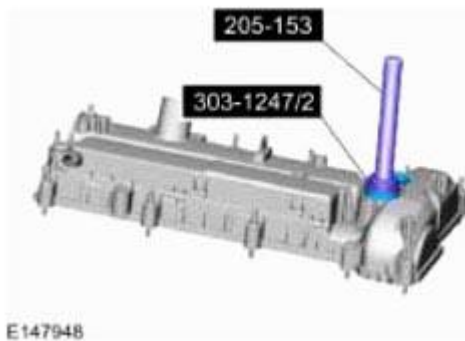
Installing VCT Spark Plug Tube Seal Using Special Tools 205-153 And 303-1247/2
